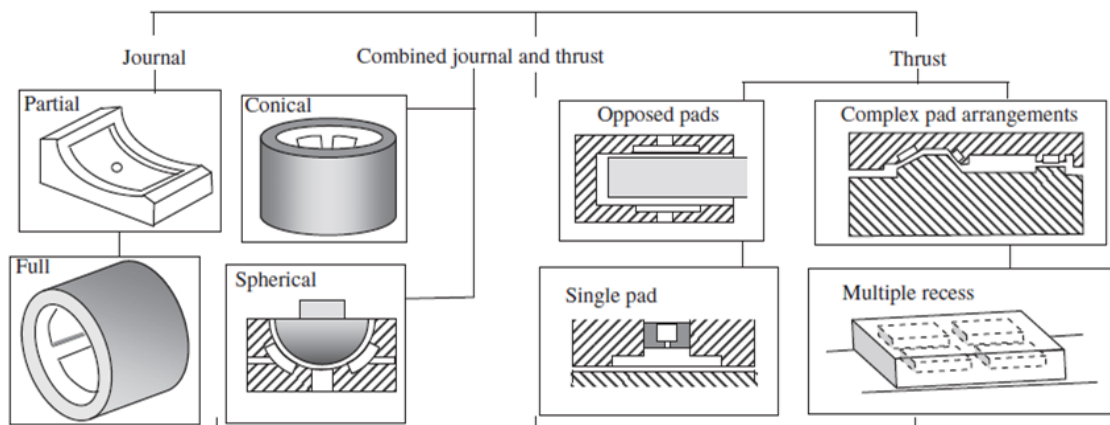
Hierarchy of Externally Pressurized Bearings. [22]
